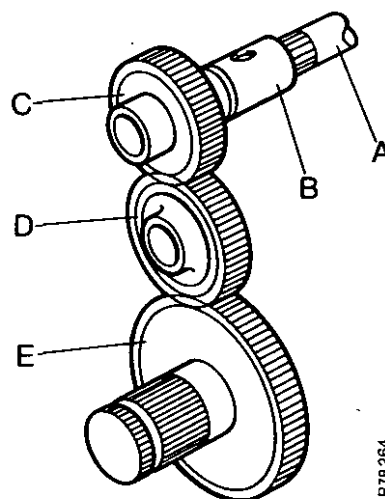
TRANSFER GEARBOX DRIVE TRAIN
